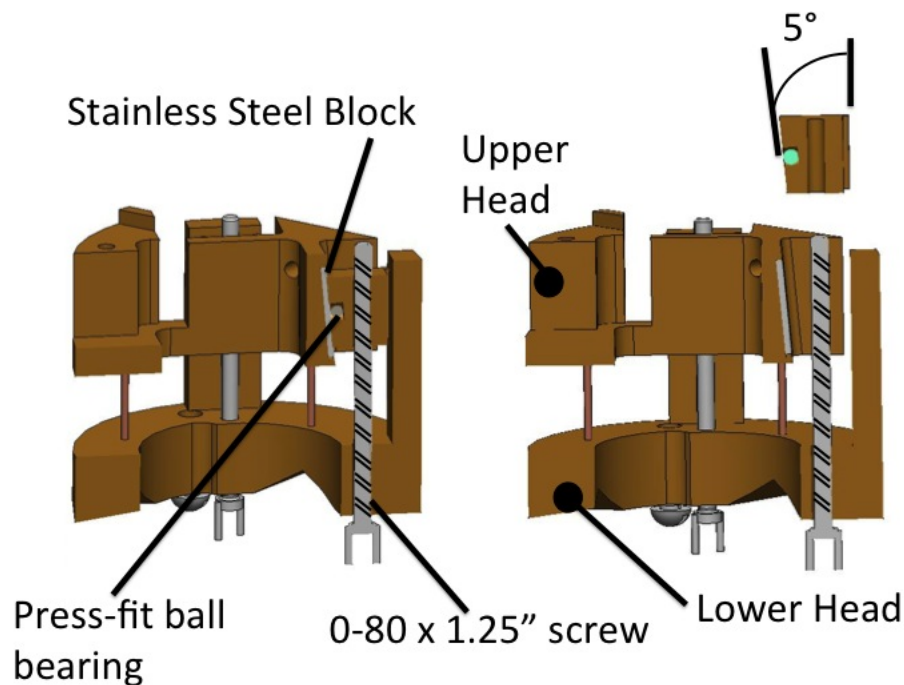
The figures show the cross section views of the lower and upper head. The 0-80 x 1.25" screw is turned clockwise or counter clock wise to push or pull the wedge piece that slides against the stainless steel block sitting on the groove on the upper head. The sliding of wedge piece against the stainless steel block forces the upper head to move sideways relative to the lower head. The angle between the two opposite sides of the wedge piece is 5 degrees. This slope allows us to convert the vertical movement to horizontal xy movement of the tip. Solidworks File: newhead.1.sldasm
